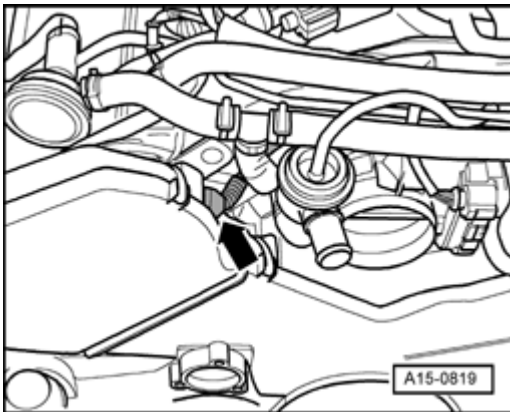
Disconnecting Electrical Harness Connector At Camshaft Position (CMP) Sensor G40
